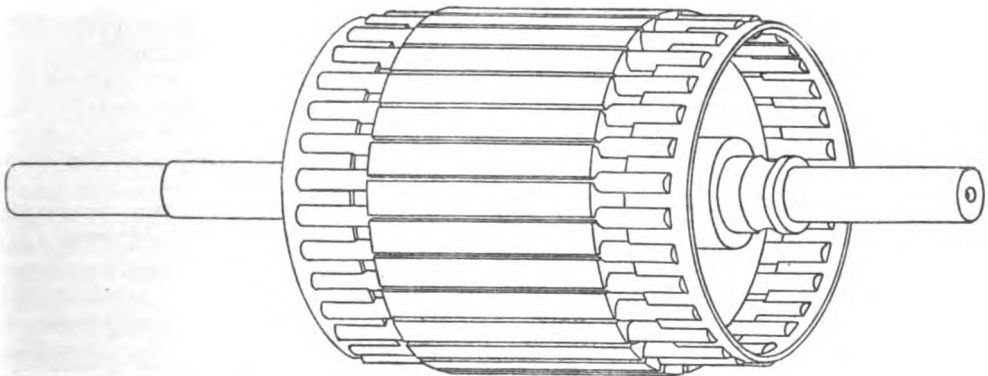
PERSPECTIVE VIEW OF A COMPLETED ROTOR OF THE SHORT-CIRCUITED OR "SQUIRREL-CAGE" TYPE
